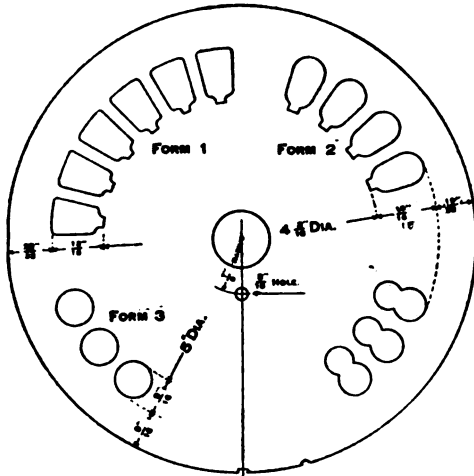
STATOR SHEET IN PARTIALLY COMPLETED CONDITION, SHOWING SLOTS AS PUNCHED WITH AID OF INDEXING MACHINE
